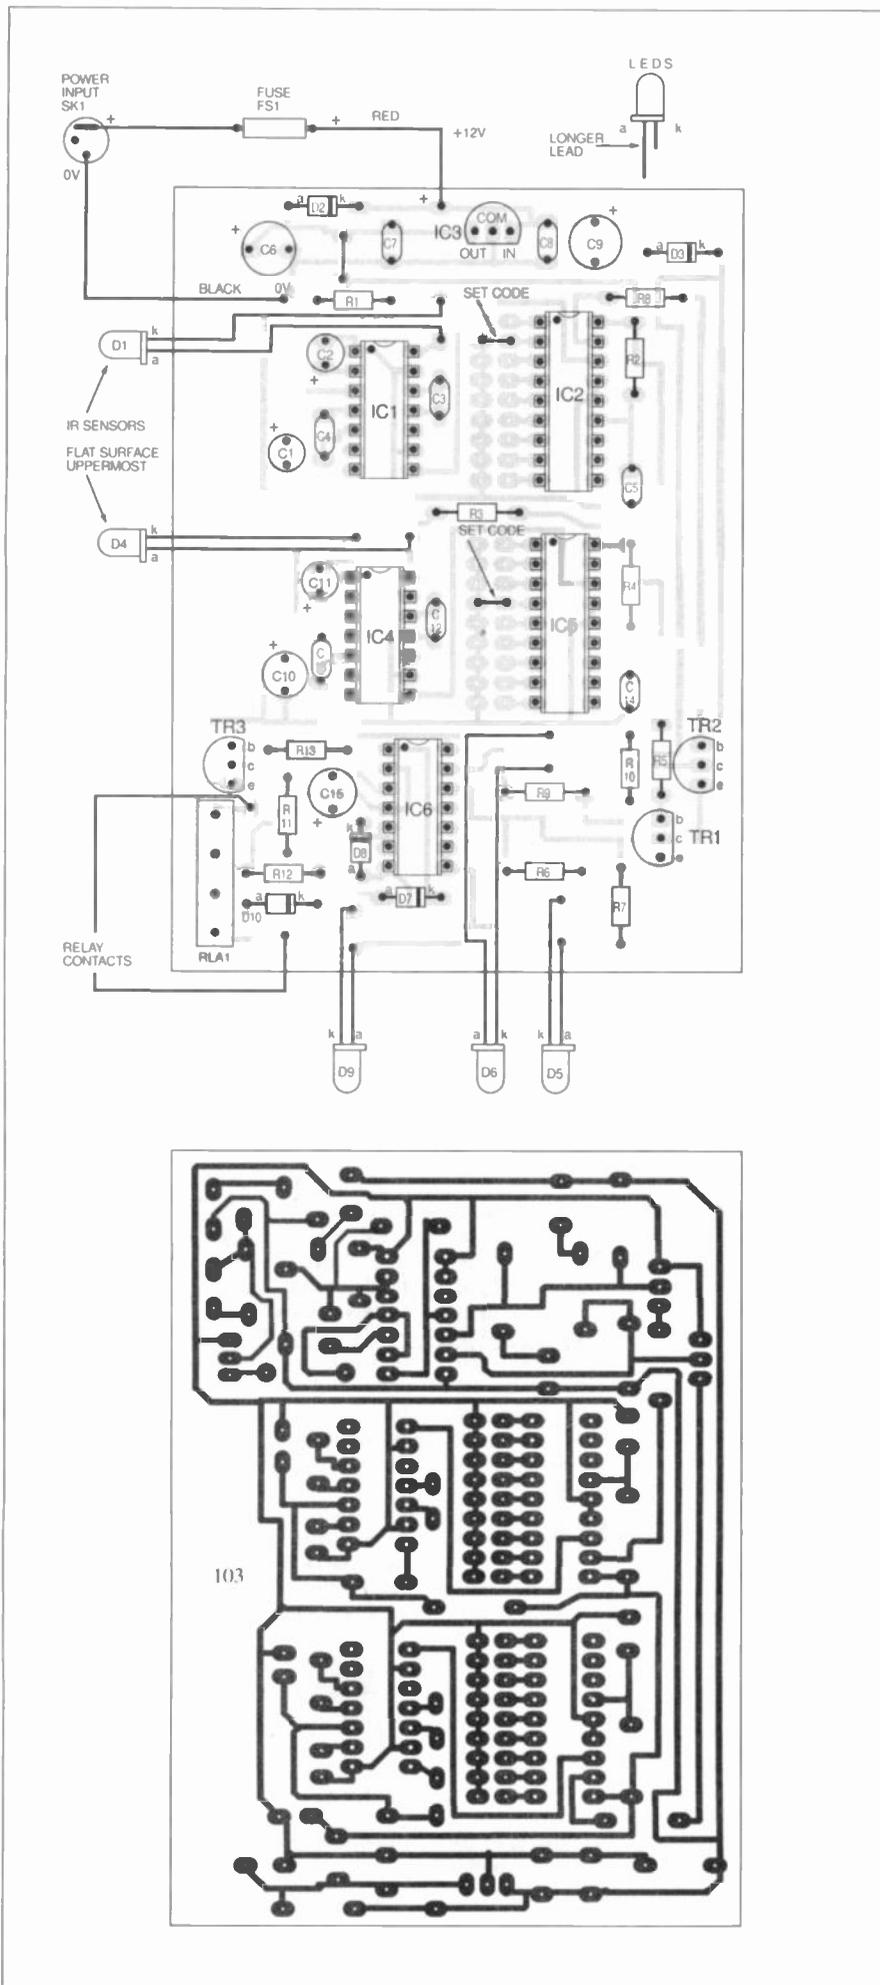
Receiver printed circuit board component layout and full-size underside copper foil master track pattern.
